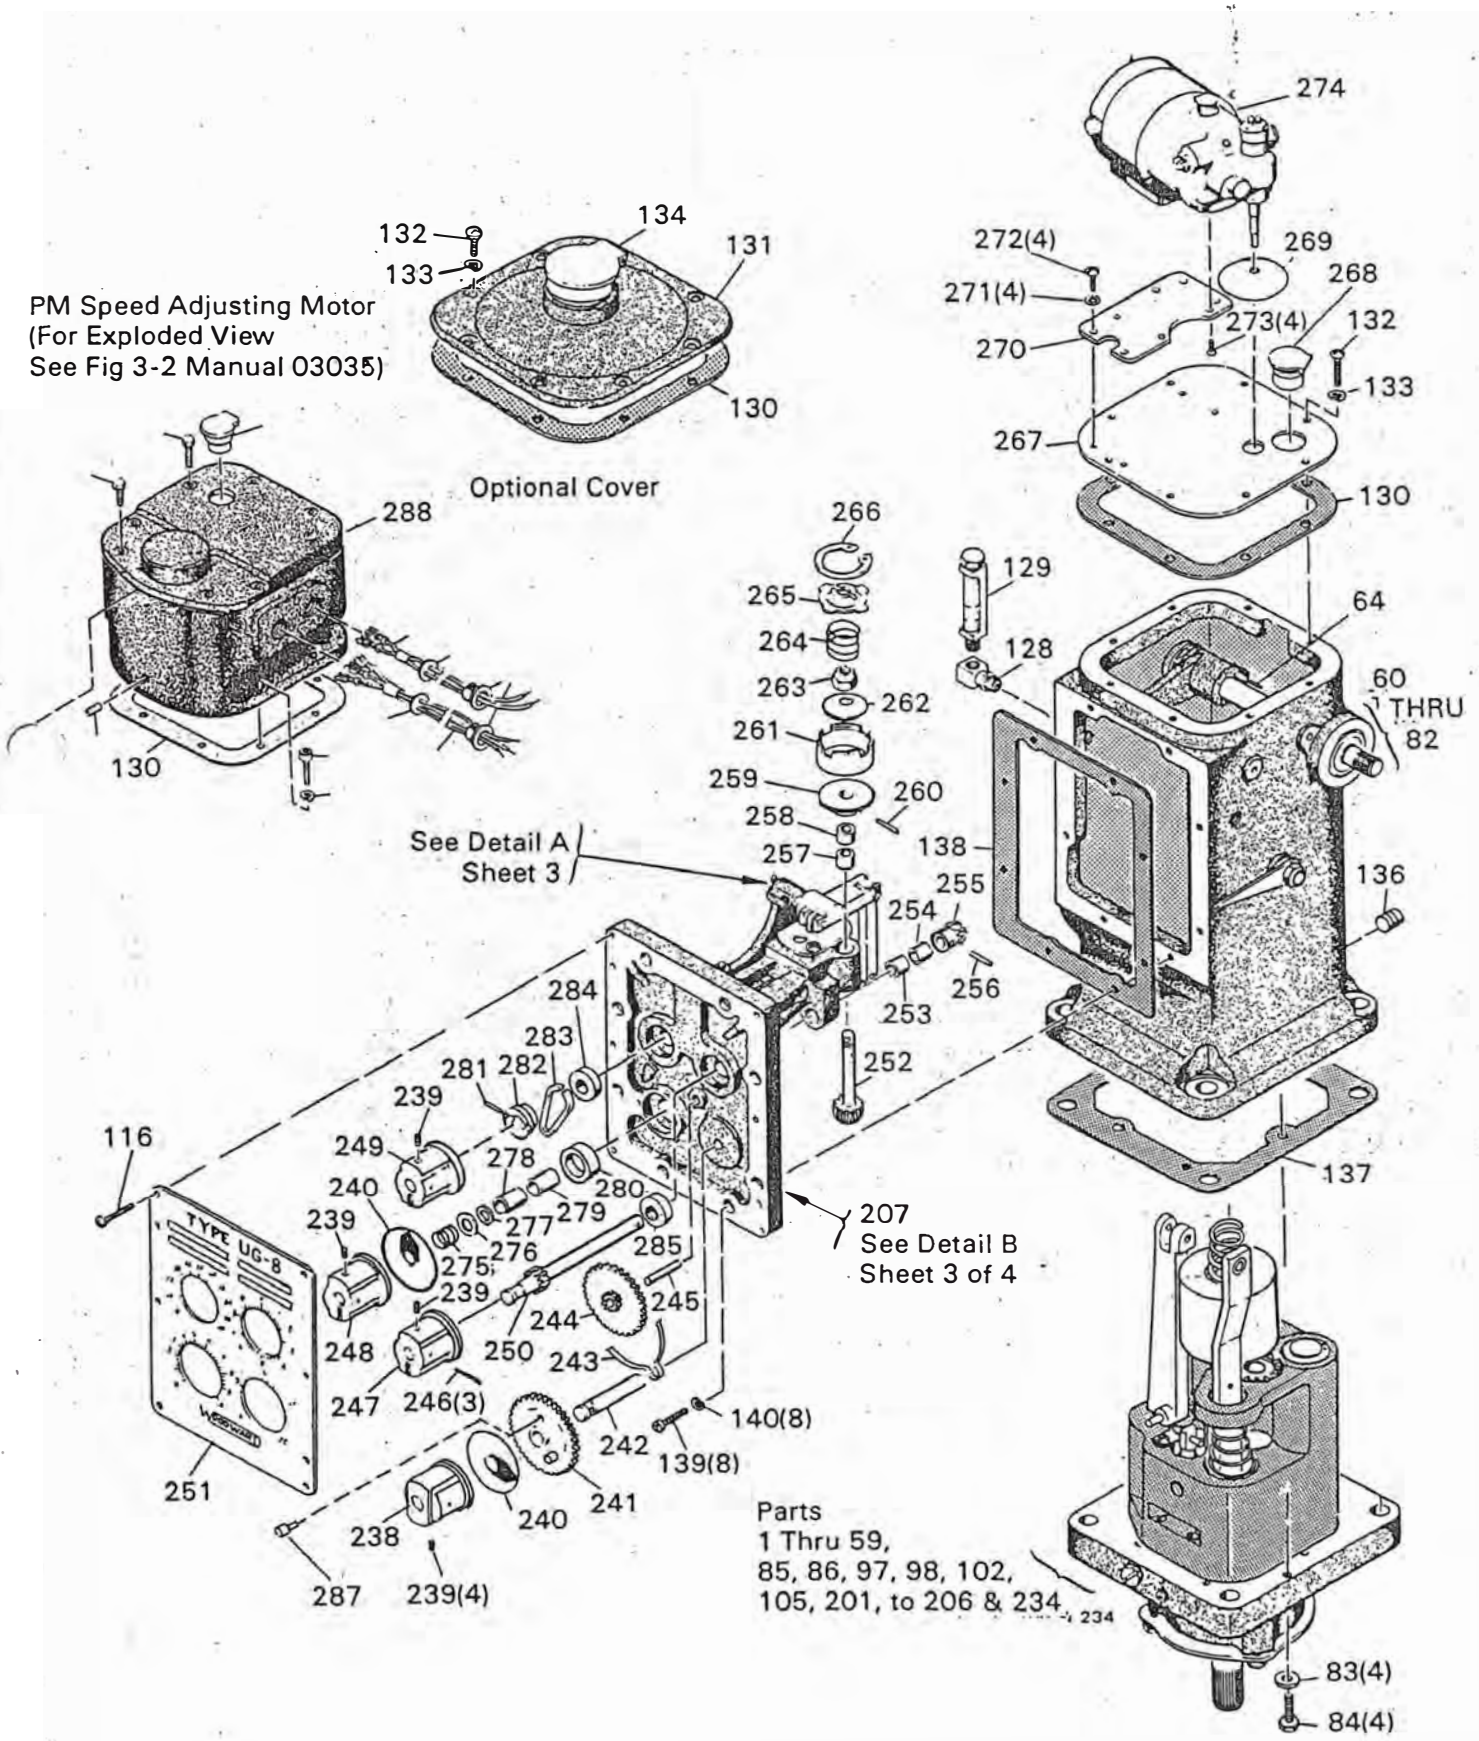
Exploded View of UG8 Dial Governor (Sheet 4 of 4)
